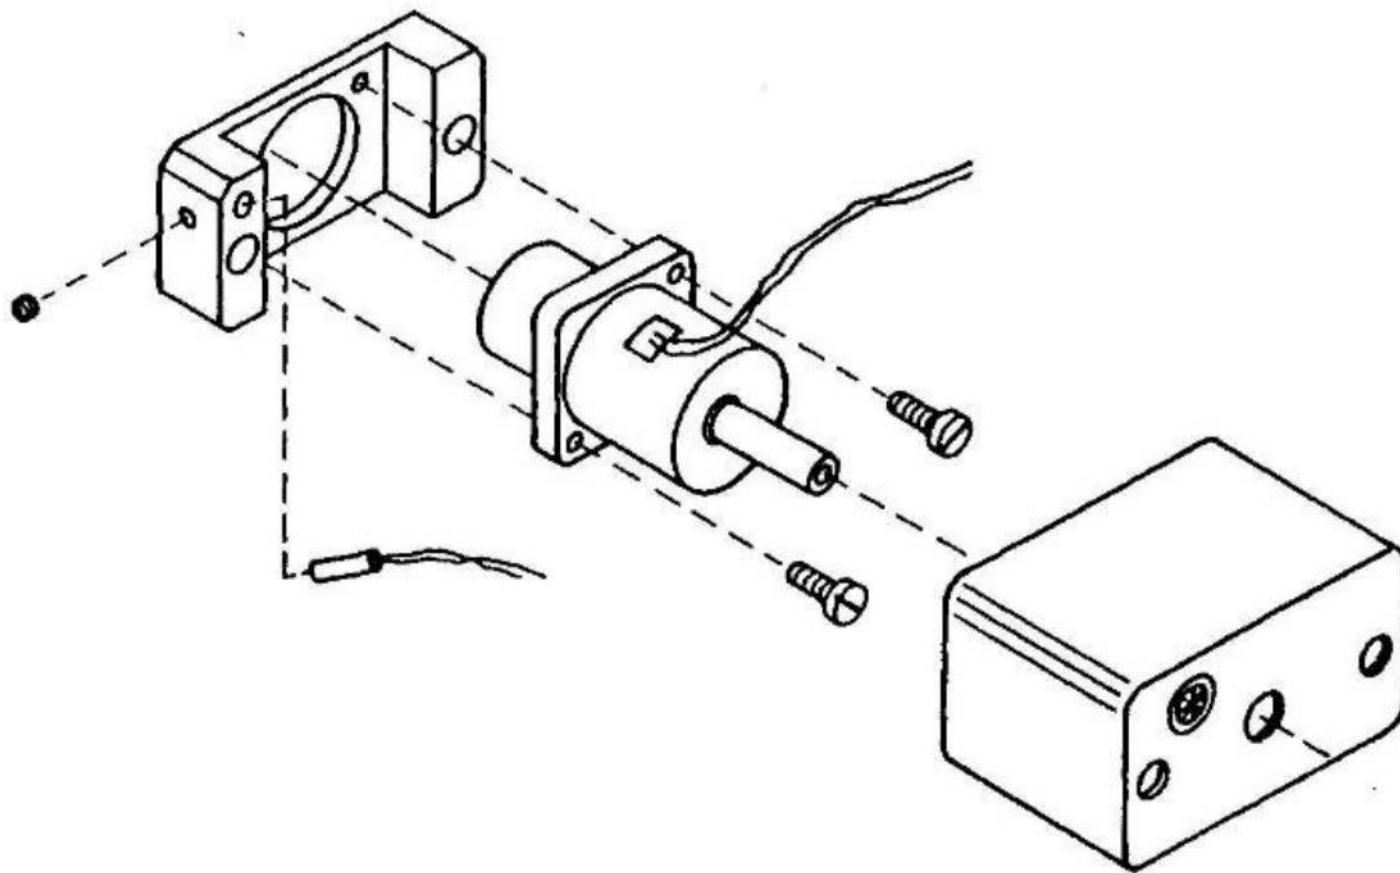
Redesign of motor drive assembly following design for assembly (DFA) analysis. (1988)
